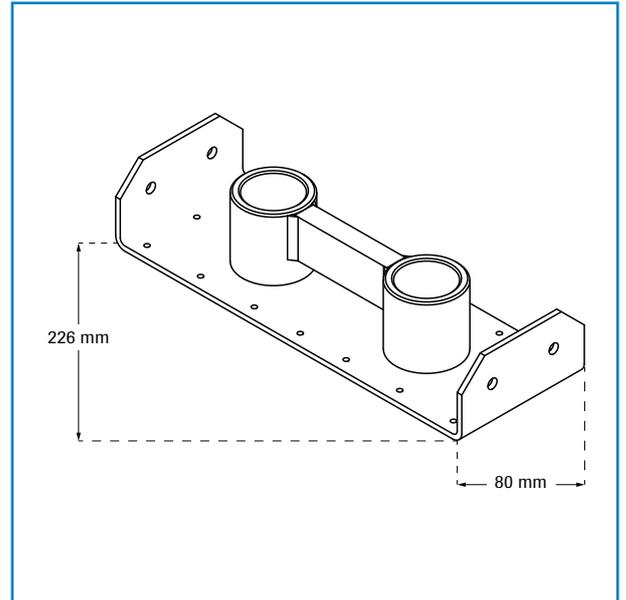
Dimensions G 1"-double-screw on-socket for thin channels
